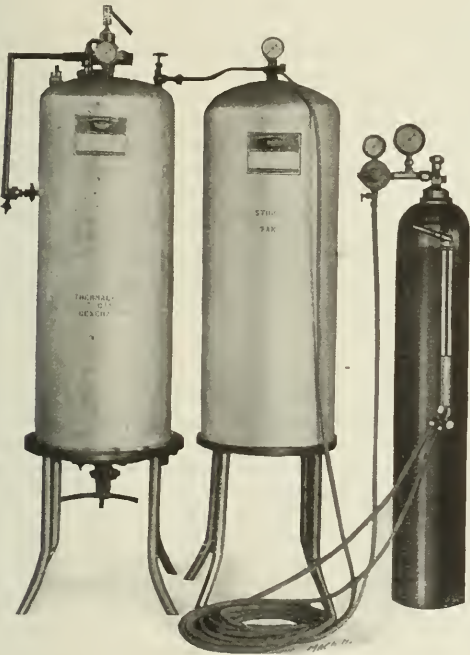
Thermalene Welding and Cutting Apparatus
